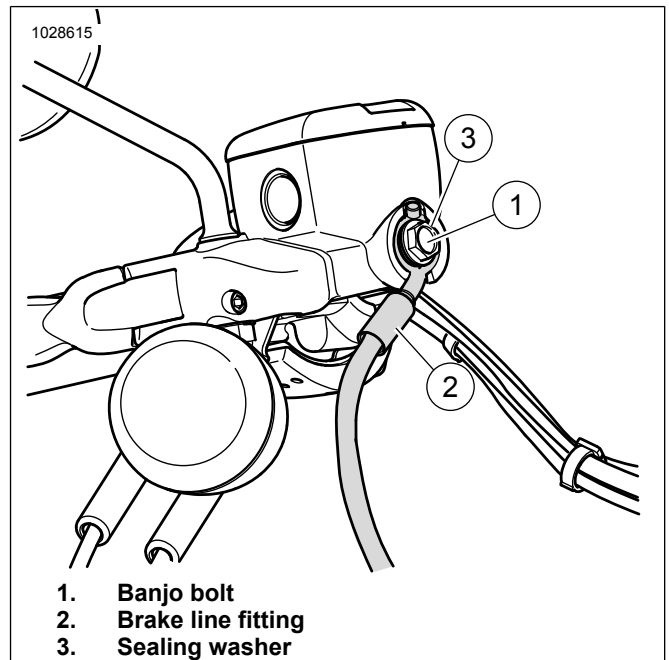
Brake Line Fitting, Banjo Bolt, and Seal
